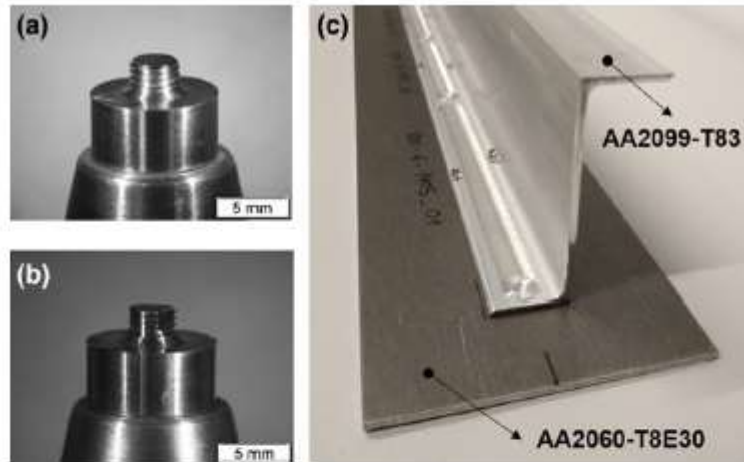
FSW tools used to produce the FSW joints; a conventional threaded cylindrical tool; b three flats + neutral thread tool; and c FSW lap joint formed by AA2099-T83 extrusion and AA2060-T8E30 sheet
